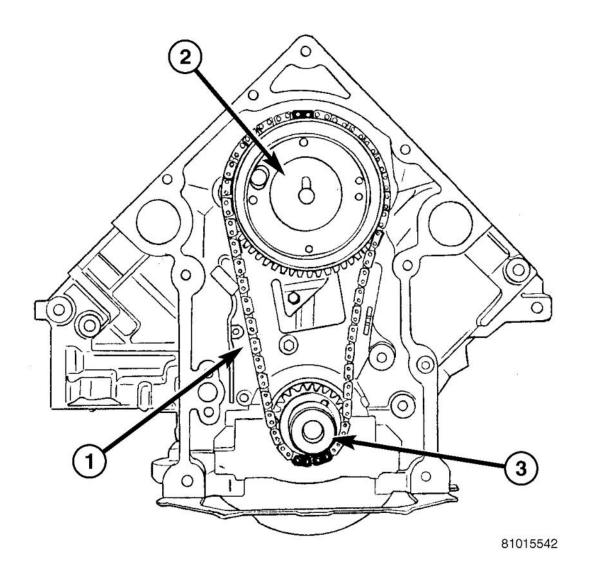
Identifying Chain Tensioner, Camshaft Sprocket & Crankshaft Sprocket Courtesy of CHRYSLER LLC
